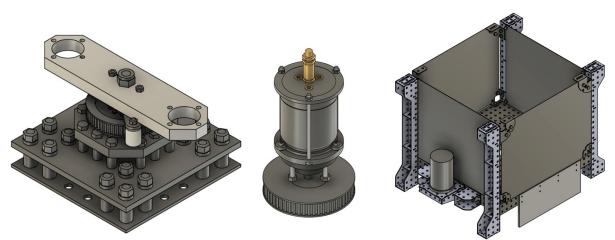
Subassemblies of Pluto Mills prototype: 1 The main shaft [Left], 2 vial and shaft [centre], 3 safety enclosure [right].
